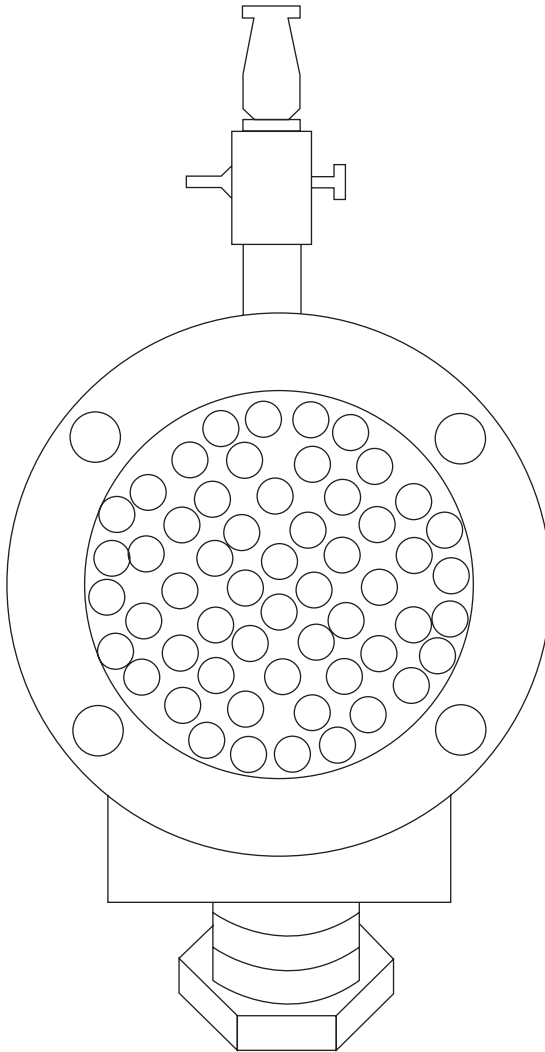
Side view of tube layout in the shell and tube heat exchanger.
